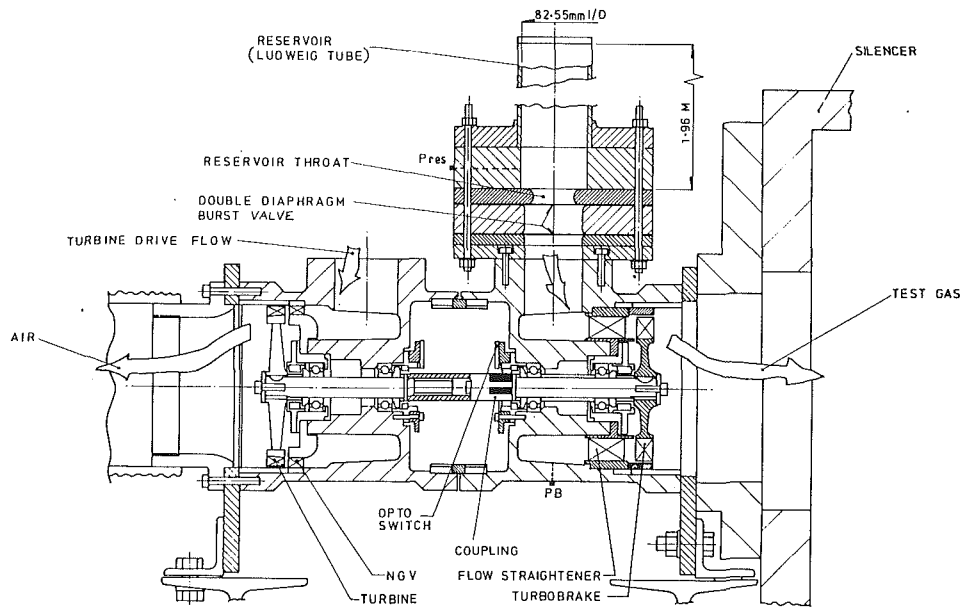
Model (0.17 scale) axial turbobrake test facility, constructed from two modified air motors mounted back to back
